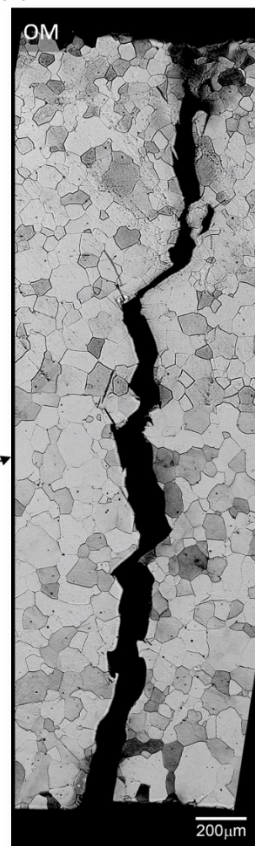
Failed C26M drawn tubes with cracks initiating near the shoulder of the pointing end.
